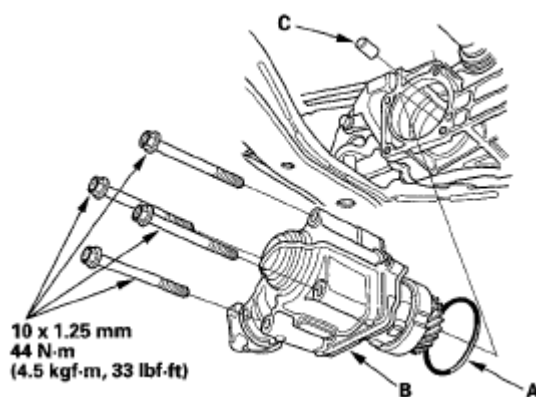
Identifying O-Ring, Transfer Assembly And Dowel Pin With Torque Specification
